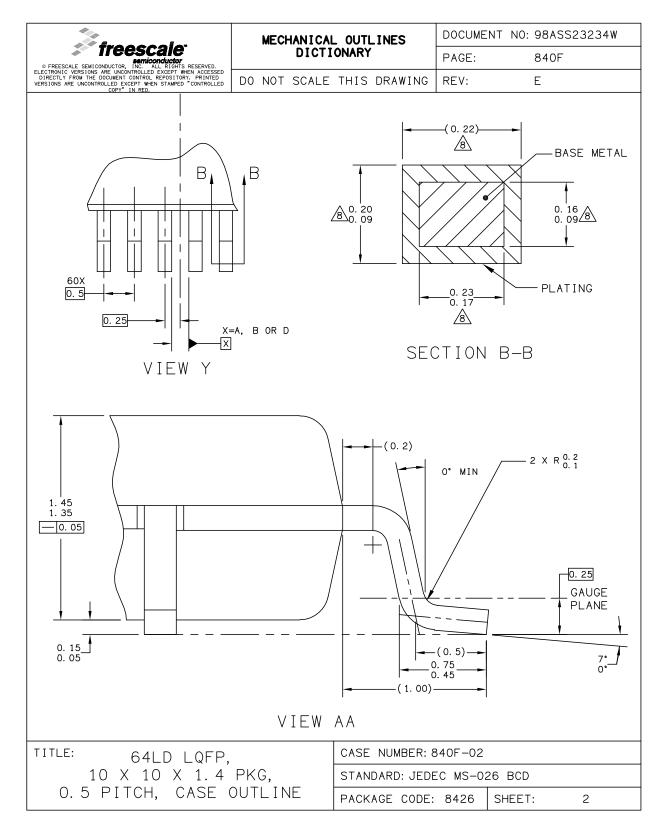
64 LQFP package mechanical drawing (2 of 3)
